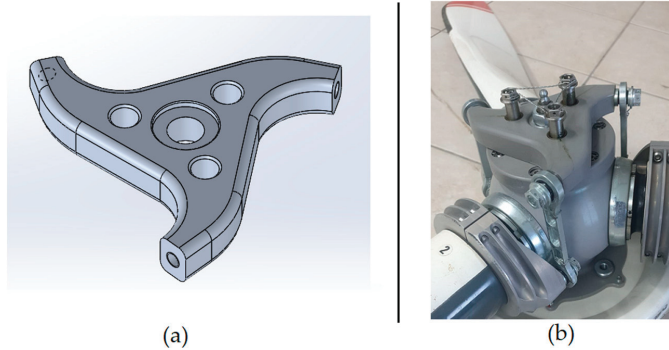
(a) 3D CAD model of the Propeller Pitch Controller (PPC); (b) Real part assembled with the blades.
